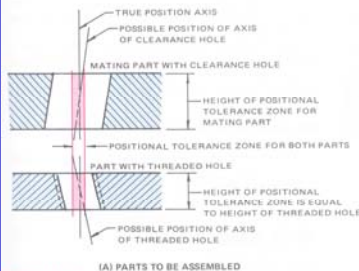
Illustrating how a fastener can interfere with a mating part.
